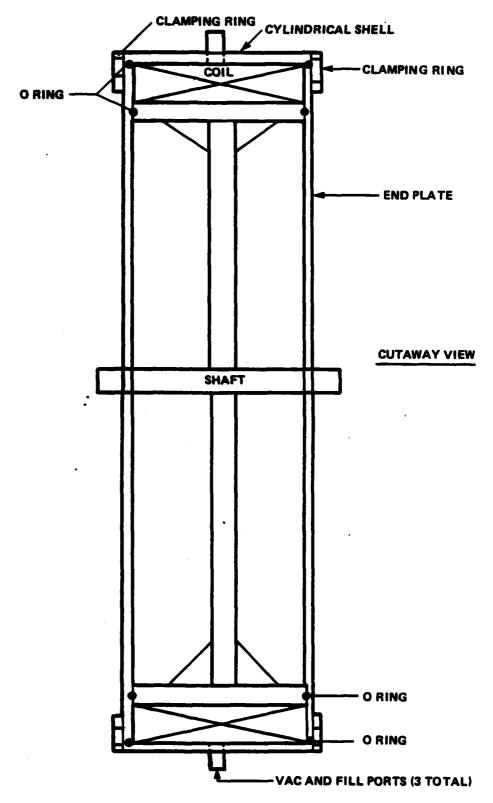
0.61-Meter Magnet Winding Coil Form and Potting Chamber
